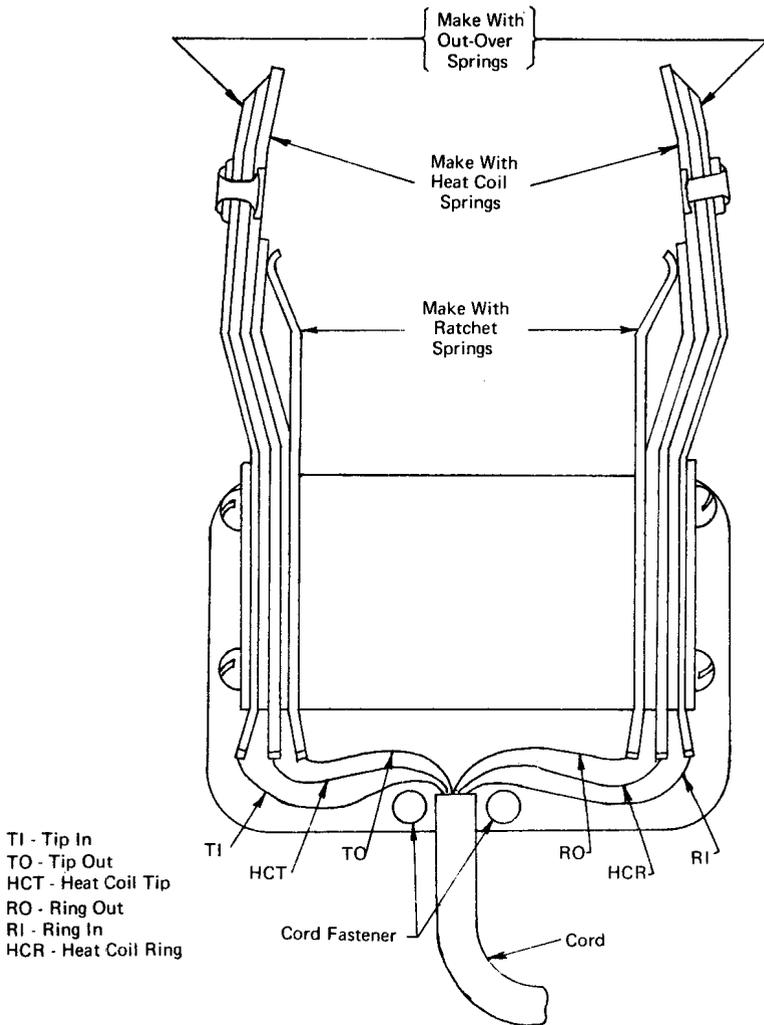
Cook 3800 Test Plugs (Shoes)
